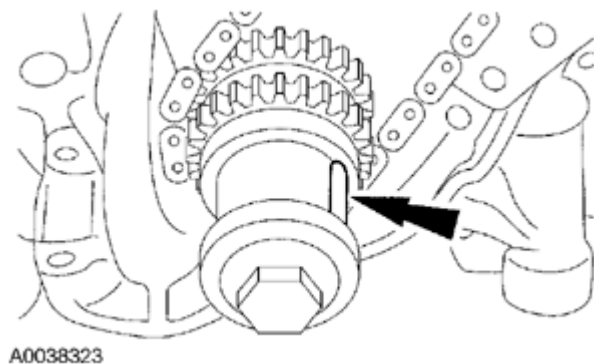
Locating Crankshaft Keyway Is In 3 O'Clock Position
